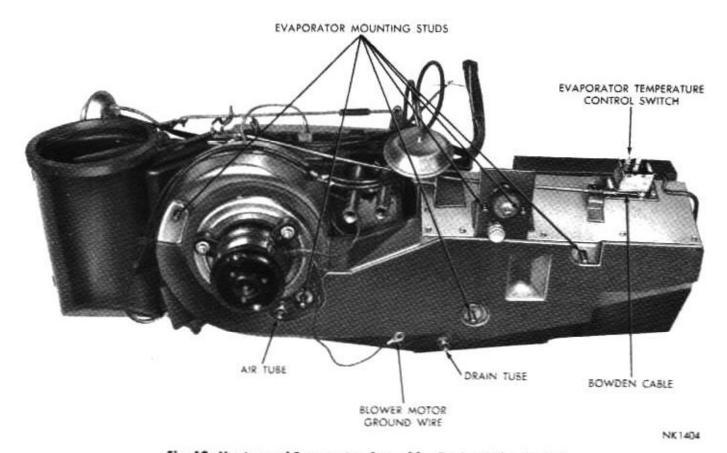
Heater and Evaporator Assembly—Engine Side—Typical
